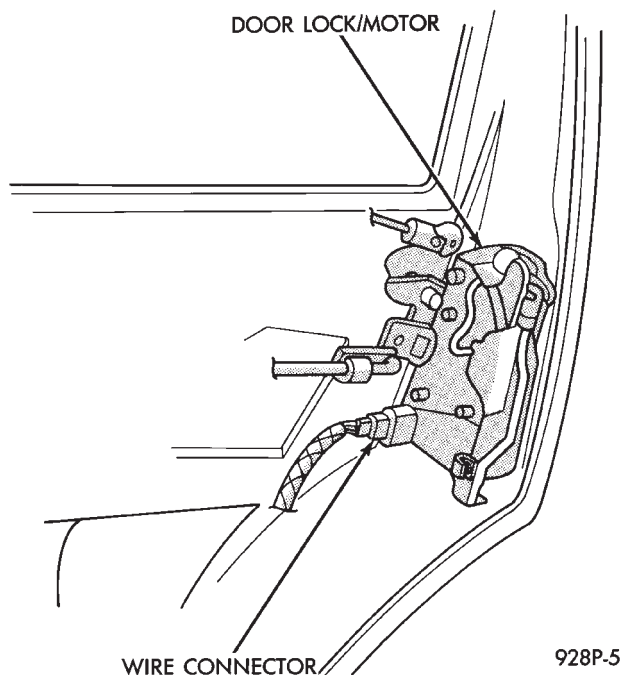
Front Power Door Lock Motors—AC and AY Bodies
